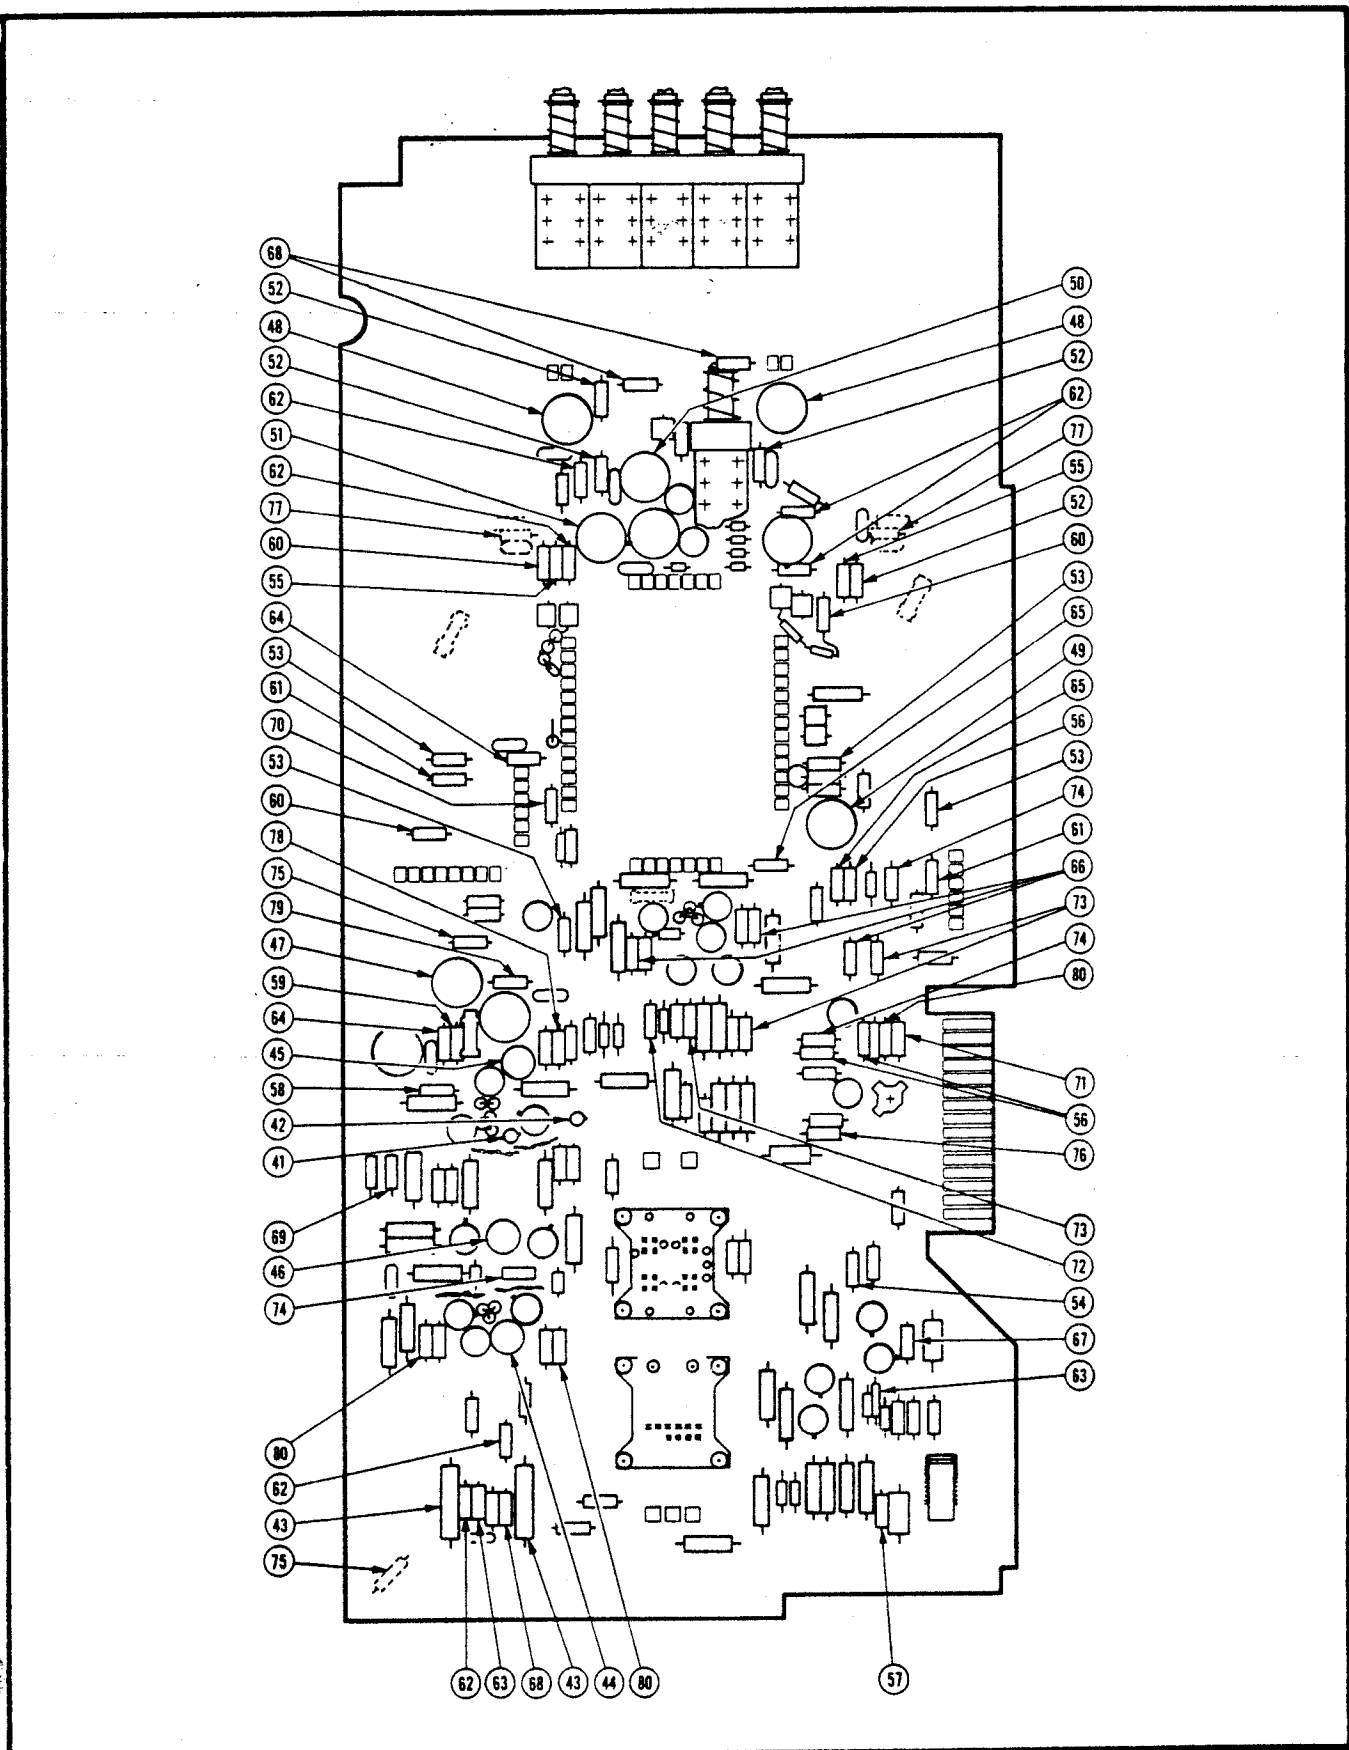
A5 Circuit Board Assembly, Vertical (sheet 2 of 4).
